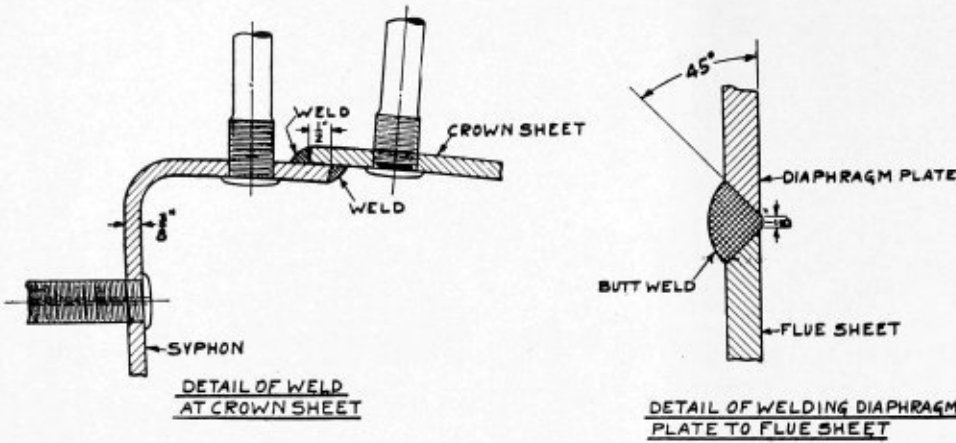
Details of the method of welding a syphon to firebox crown and flue sheets
